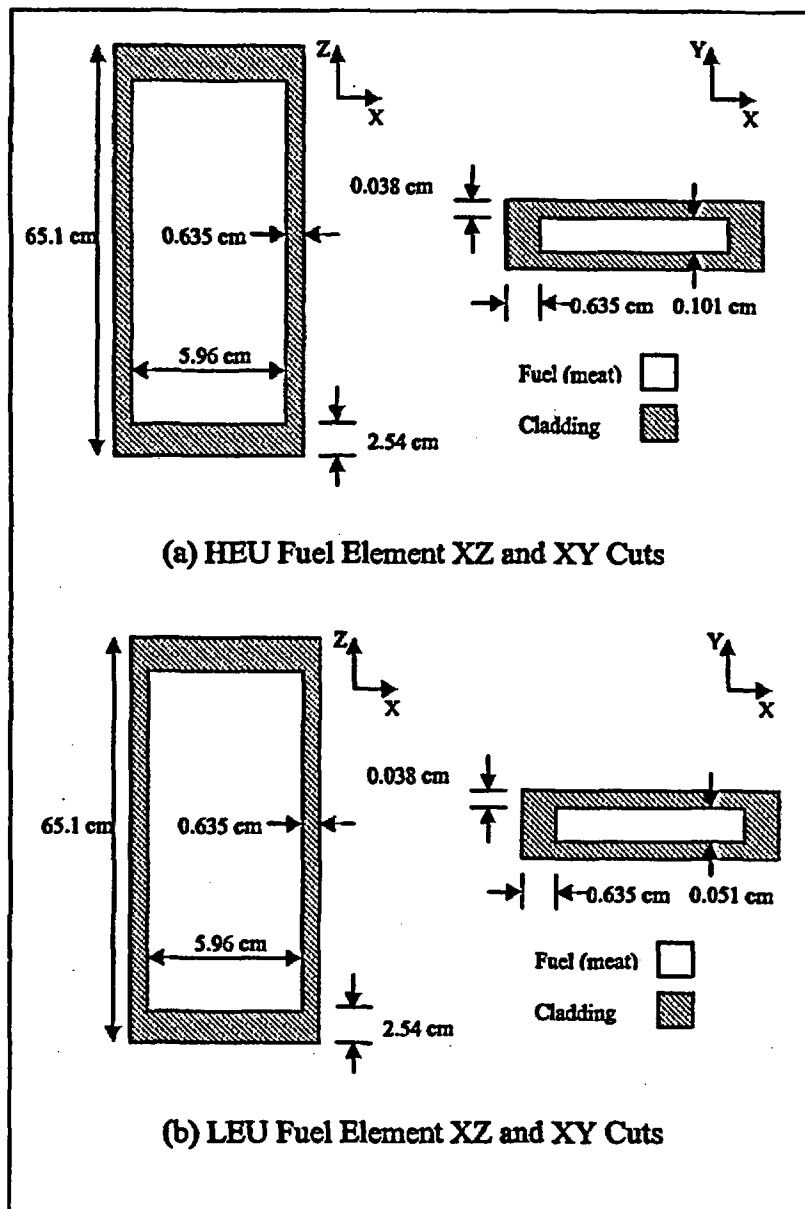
HEU and LEU Fuel Plate Dimensions
